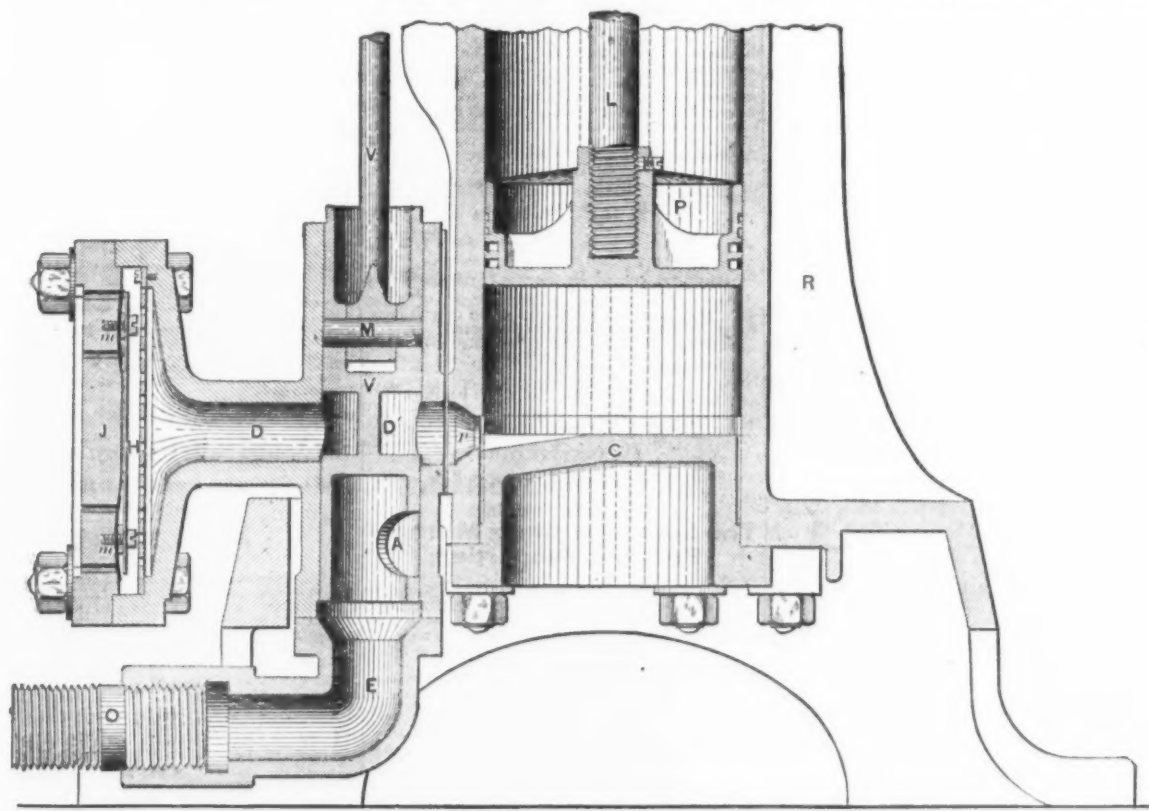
Enlarged Sectional View of Cylinder, Piston, Air and Distributing Valves.
